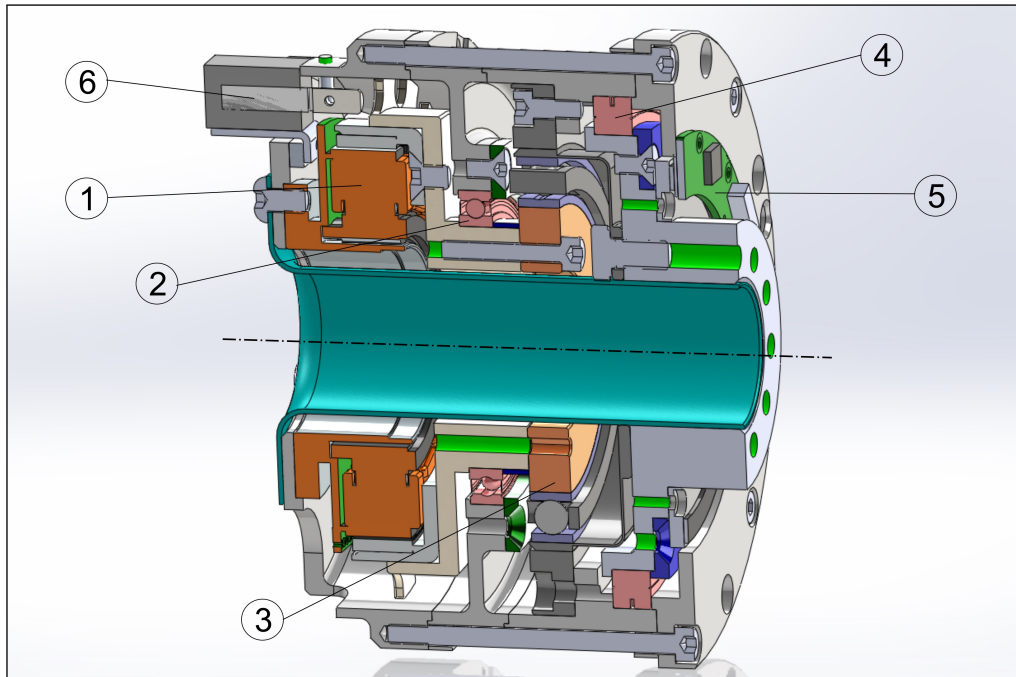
Robot shoulder drive definitive design. Overall section is illustrated: (1) motor, (2) motor shaft bearing, (3) harmonic drive gearing, (4) output shaft bearing, (5) absolute encoder, (6) emergency brake.
